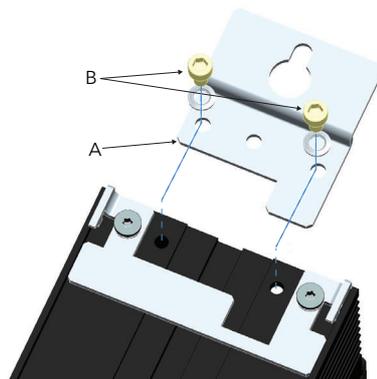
Bulkhead mounting 80A/100A unit shown (125A similar)
